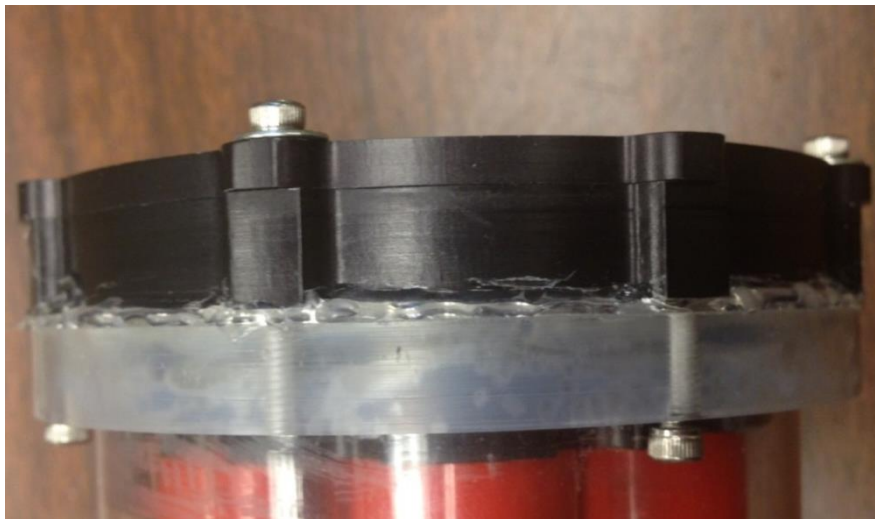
End Cap/Ring Assembly Attached to Acrylic Flange
